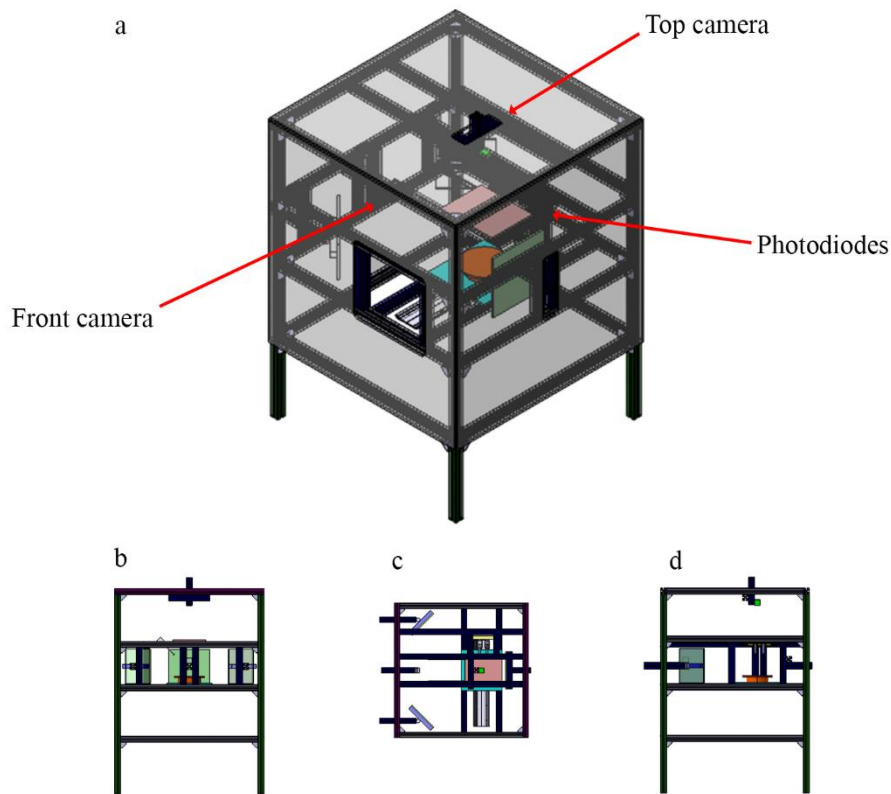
CAD model of the prototype machine. Isometric (a), lateral (b), top (c), and front (d) views.
